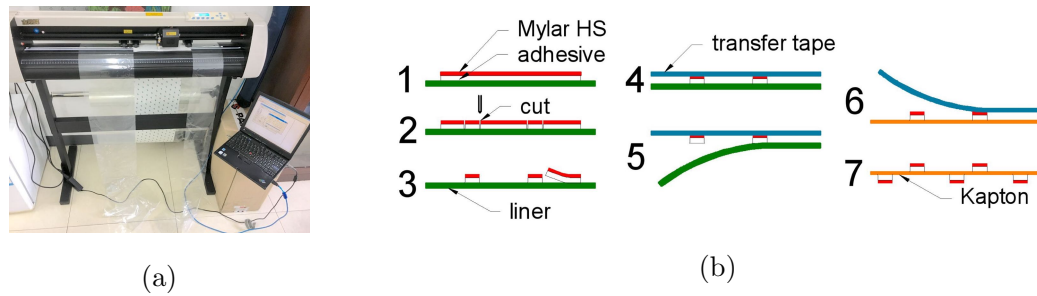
The semi-automatic method used to fabricate test samples, (a) the CNC pattern cutting machine, (b) the detailed process steps: 1-Mylar+adhesive layer prepared on a liner, 2-pattern cut by the CNC machine, 3-unwanted part removed, leaving only the hinges, 4-transfer tape applied to the top of the Mylar layer, 5-liner removed from the adhesive layer, 6-Mylar-adhesive layer transferred to Kapton, and transfer tape is removed, 7-repeating process 1-6 on the other side of Kapton.
